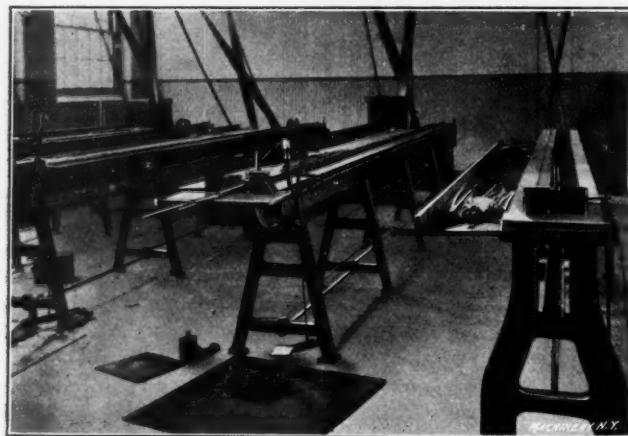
Draw Benches for Starting the Hollow Gold Wire
